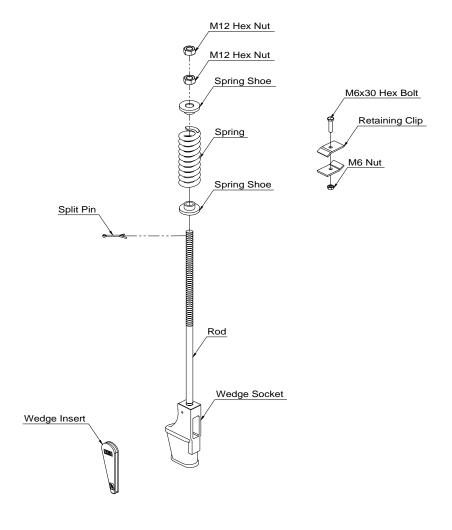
A. WEDGE TYPE ROPE SOCKET
